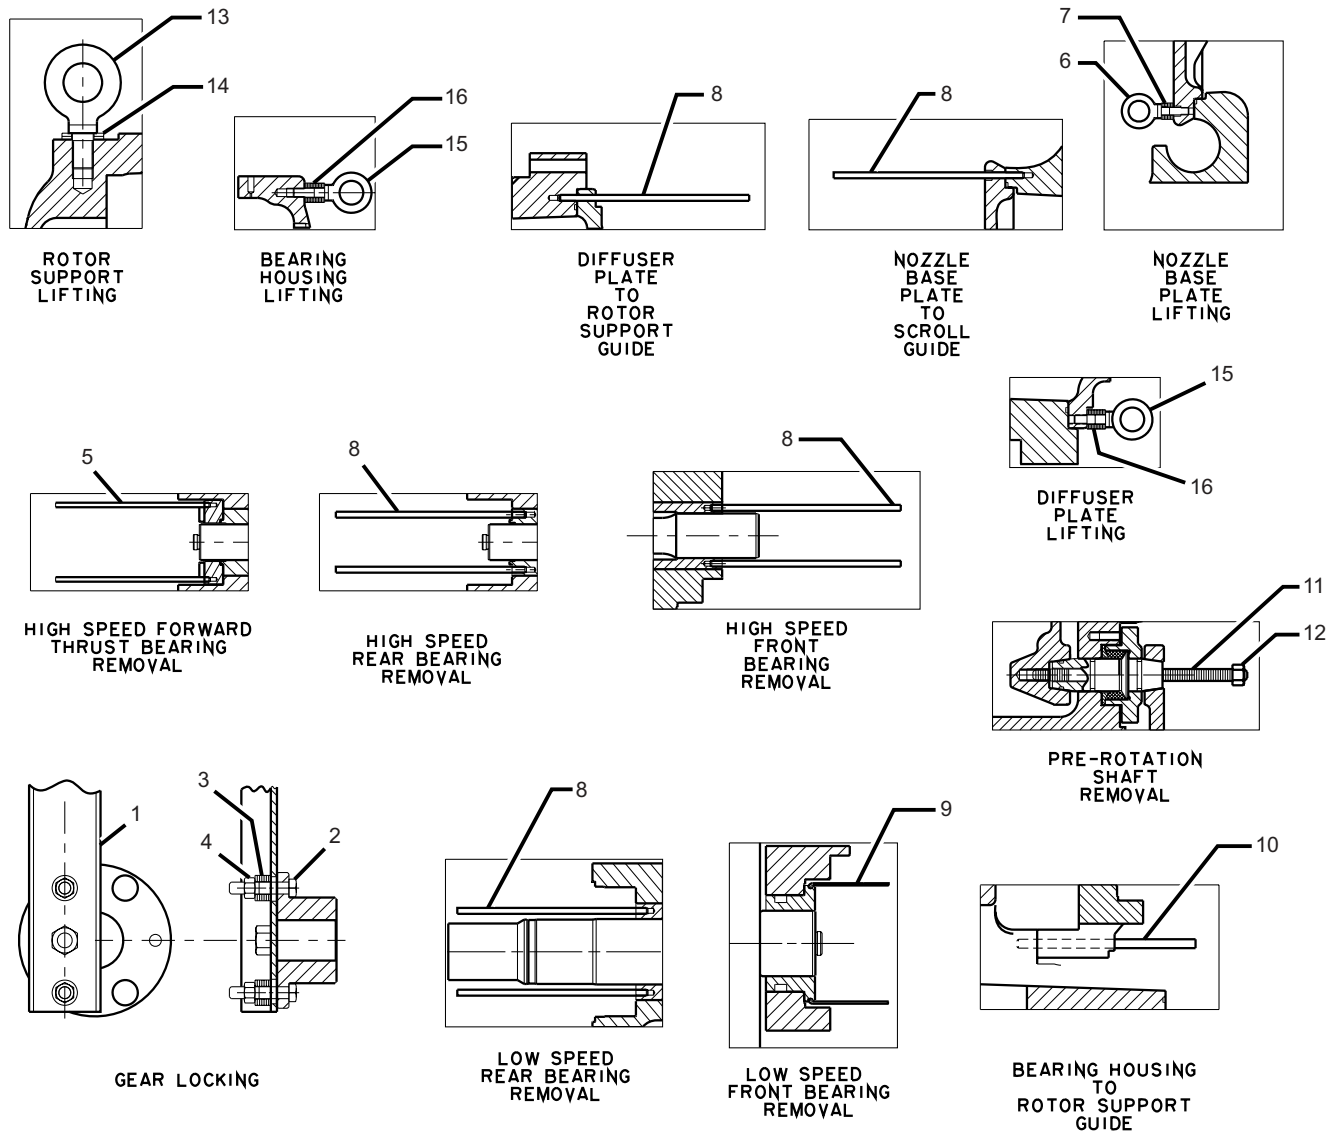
USE OF COMPRESSOR TOOLS (-65, -73, -81, -90)
